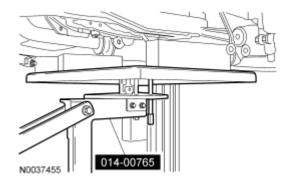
Positioning Special Tool (014-00765) Under Subframe Assembly
